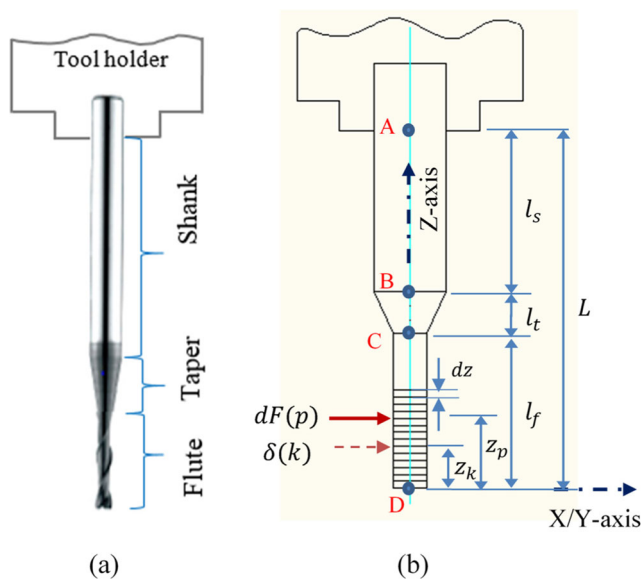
Tool deflection model of micro-end mill. (a) Parts of micro-end mill and (b) schematic representation
